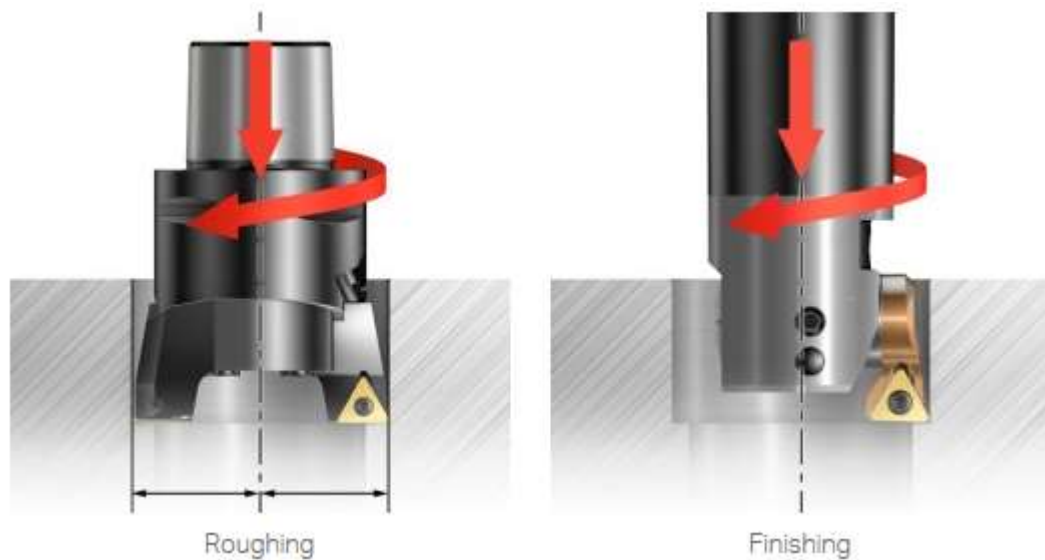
Demonstration of roughing and finishing in boring machining operation [13].
